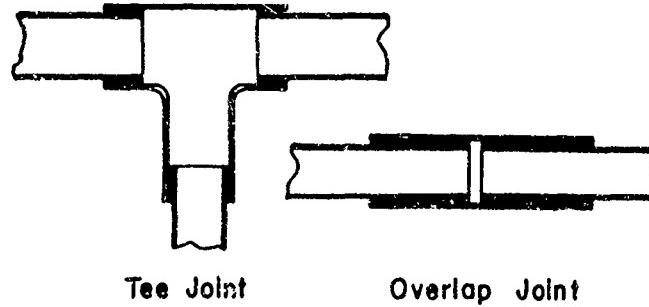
DESIGNS FOR CYLINDRICAL JOINTS (REF. 24)
